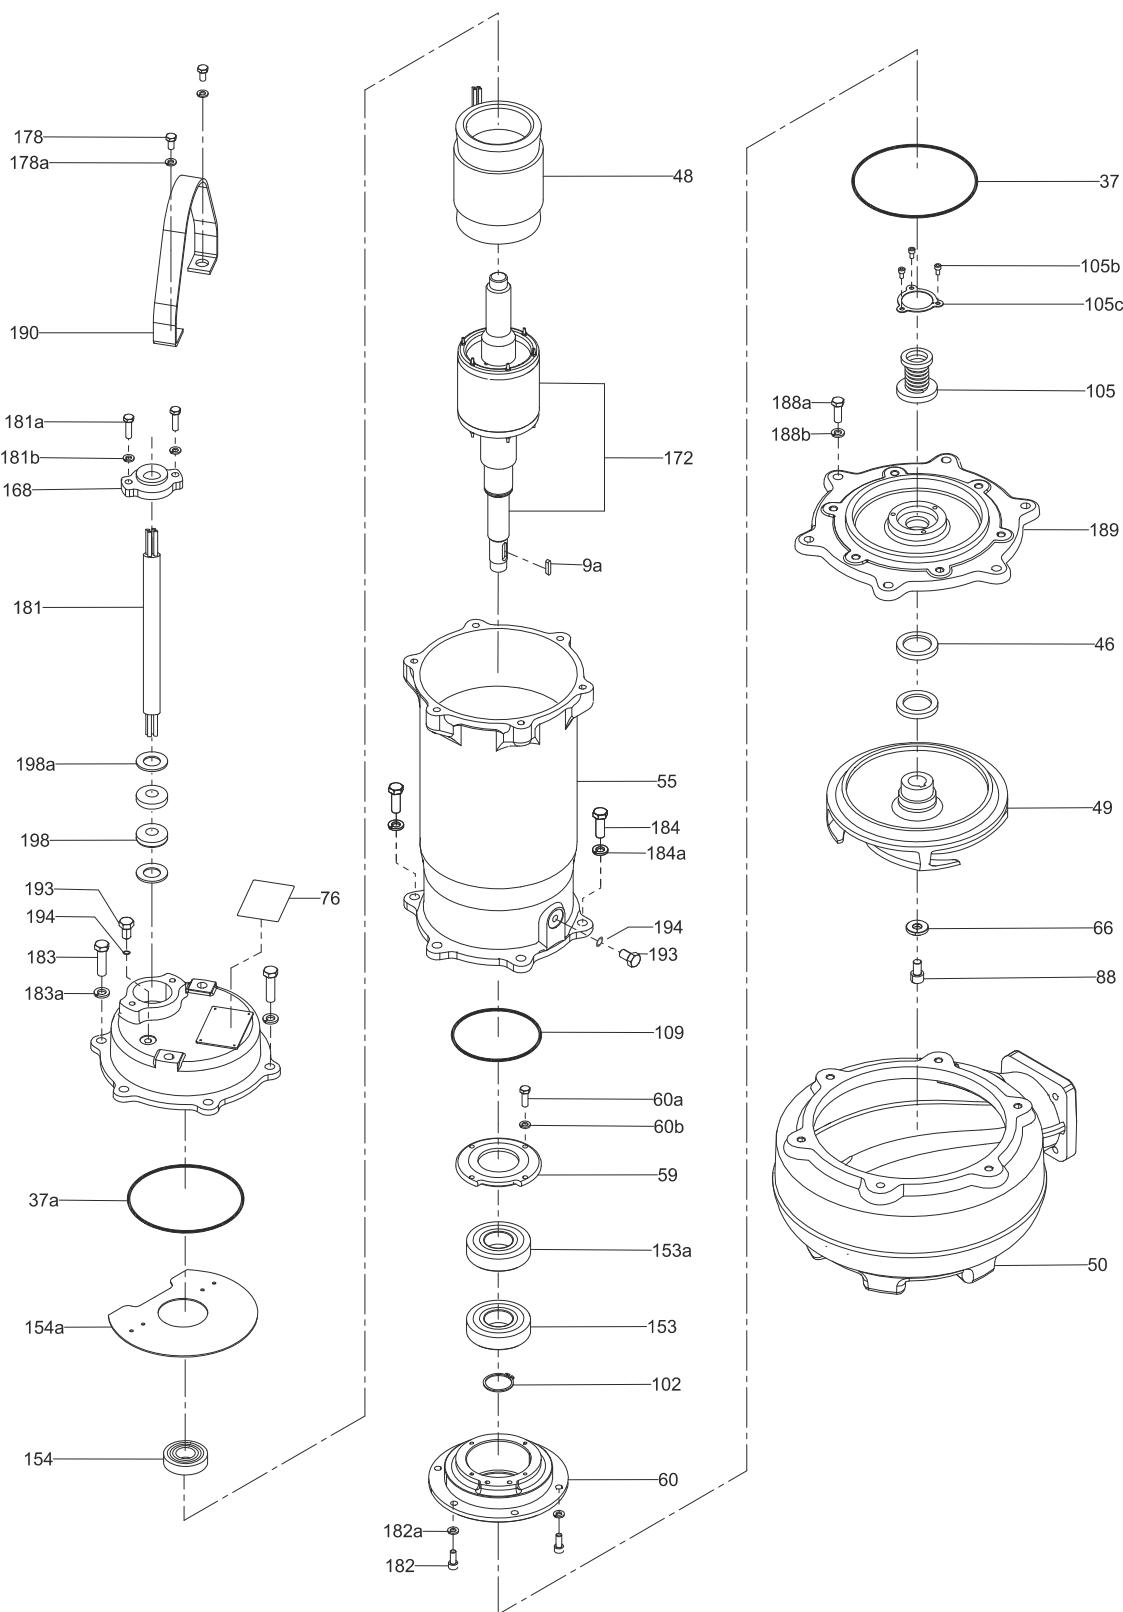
Exploded view DPK.V.80.80.37.4, DPK.V.80.80.55.4 and DPK.V.80.80.75.4
